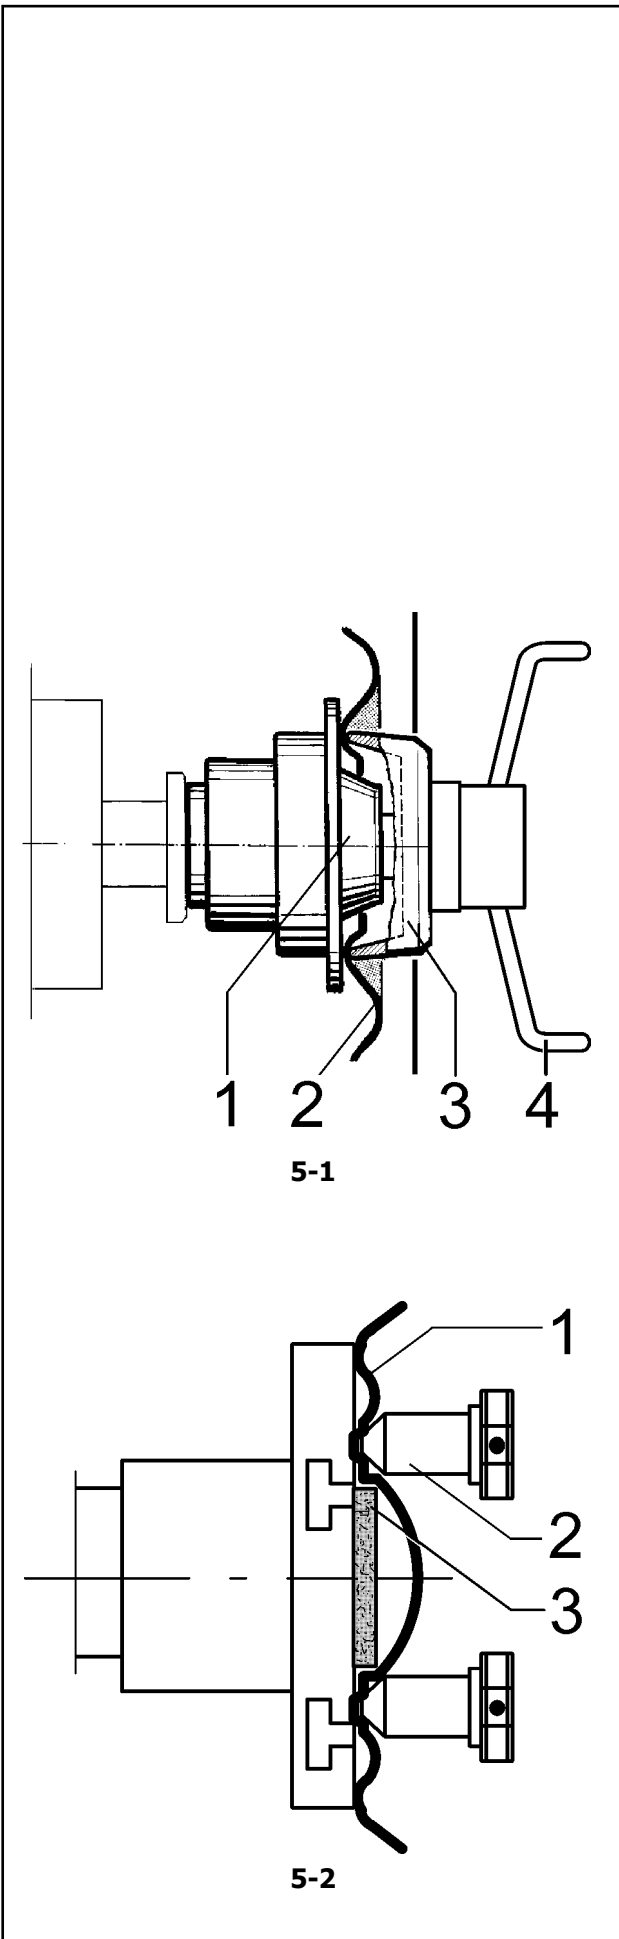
Clamping adaptor to clamp centre bore car wheels.
